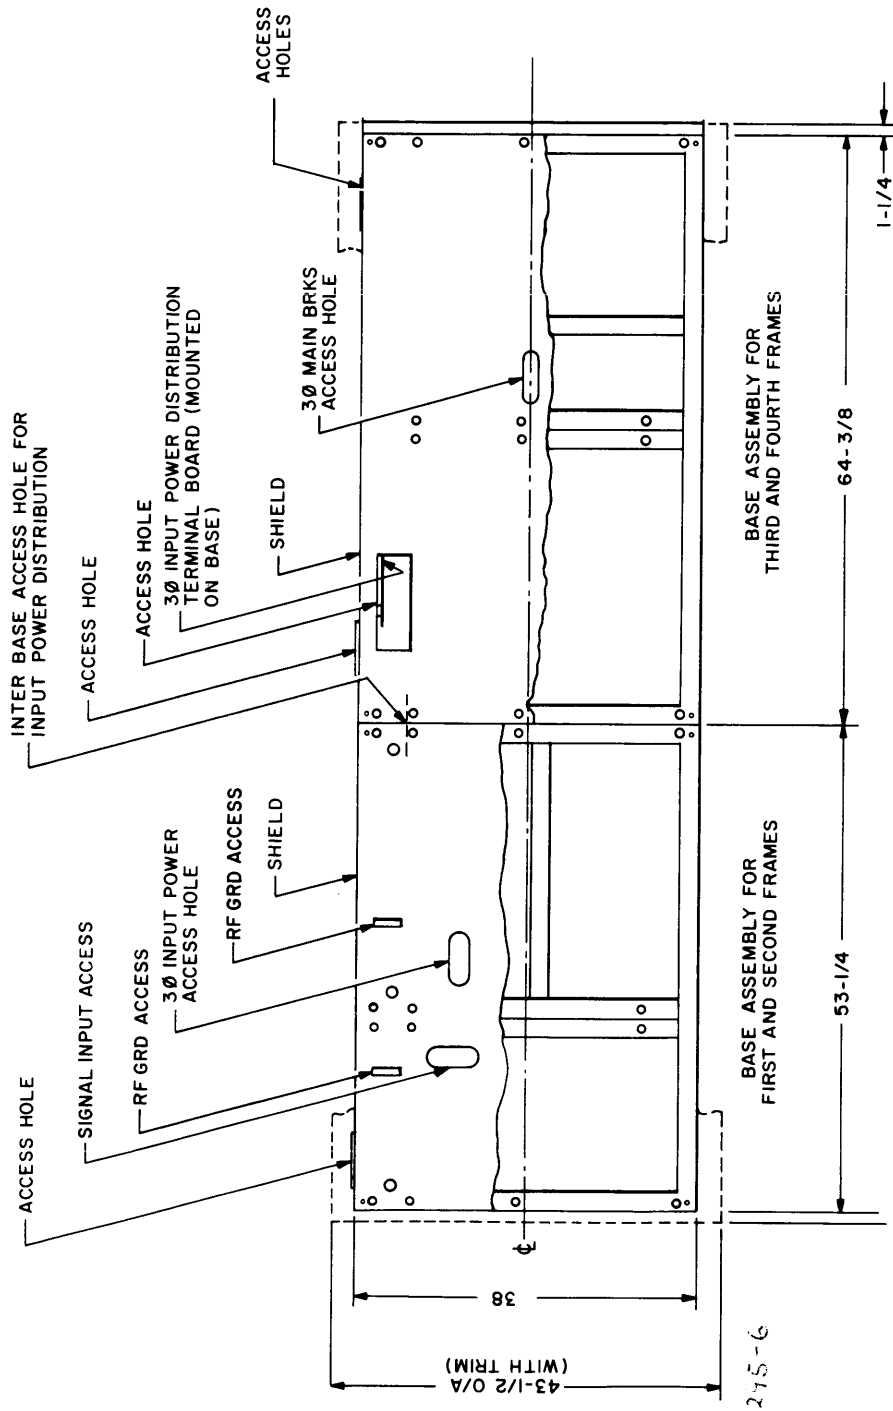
Dimensional Clearance Requirements, Installation Diagram (sheet 2 of 2).
